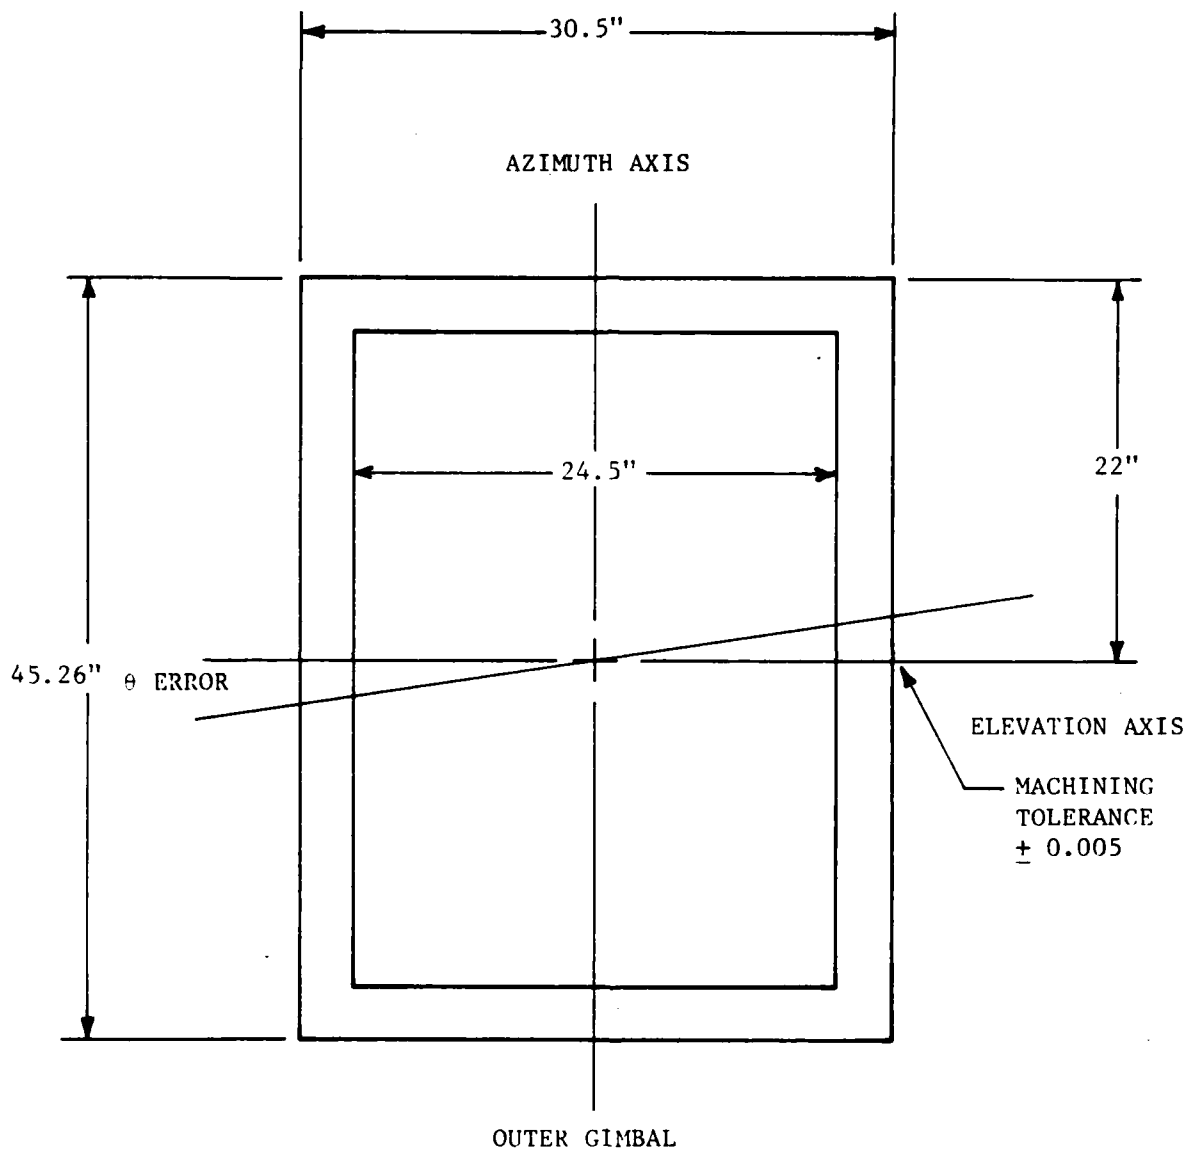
Diagram Illustrating Gimbal Misalignment Factors due to Machining Tolerances.
